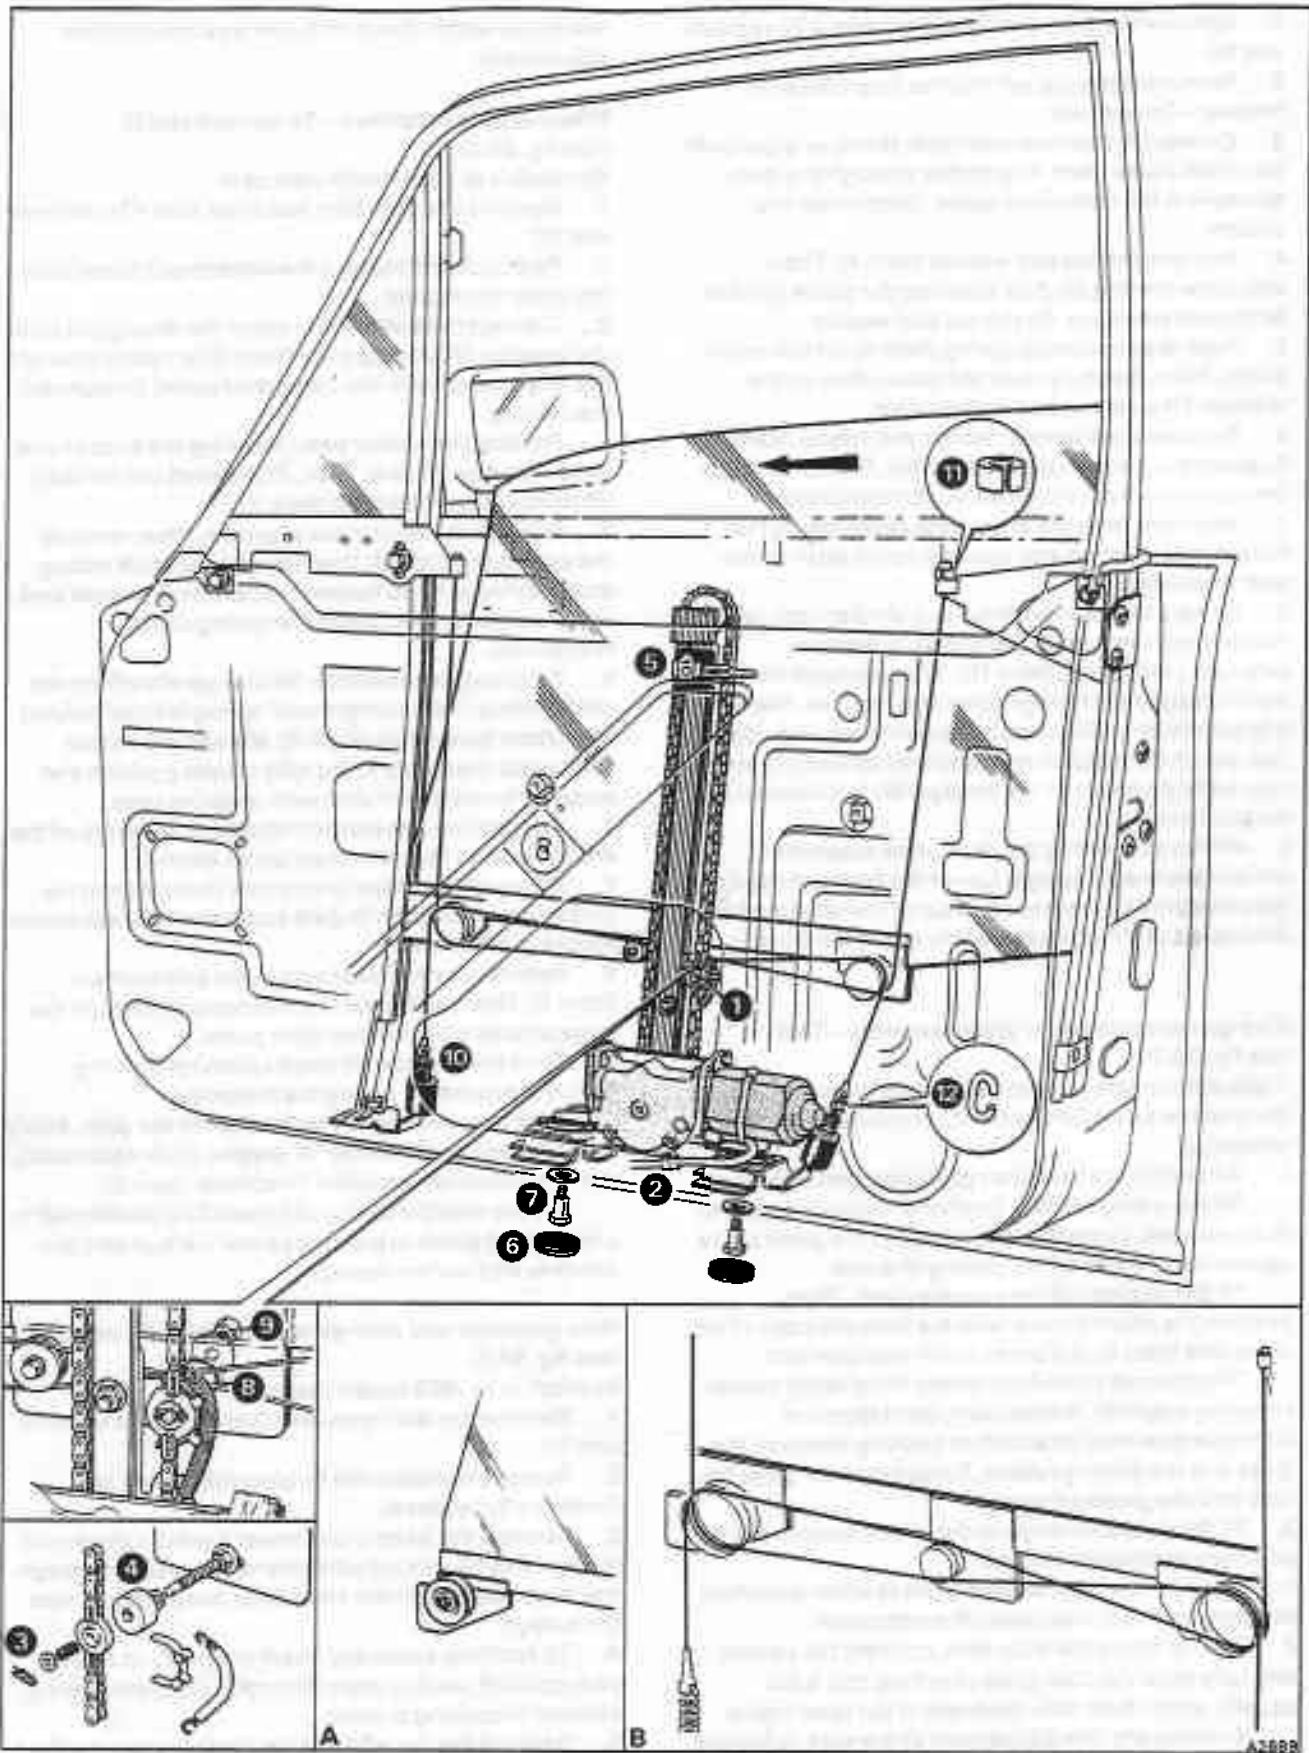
Window lift mechanism, door glass, and wire guidance assembly and fittings
